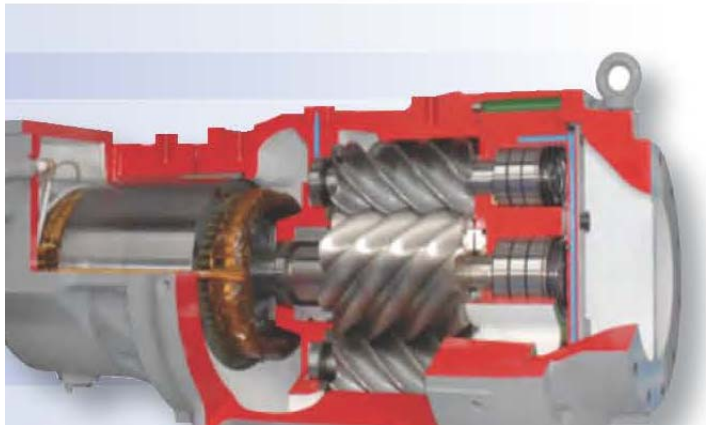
Semihermetic Twin-Screw Compressor with Suction-Gas-Cooled Motor and Slide Valve Unloading Mechanism
